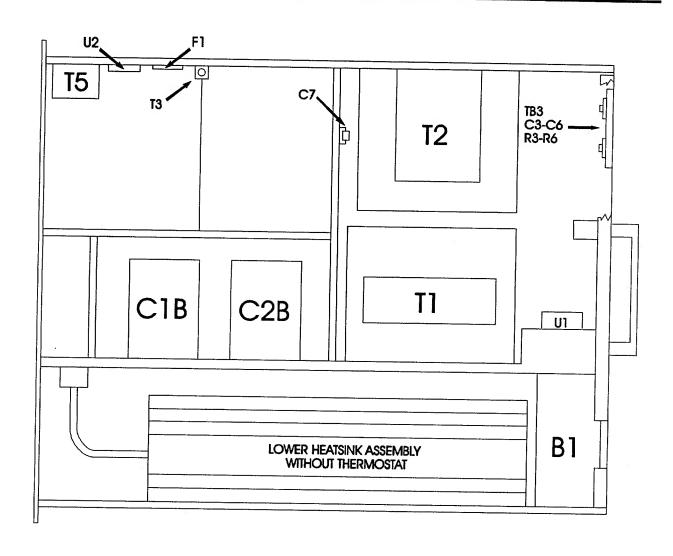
Model 1751SLE (Bottom View, Cover Removed)
